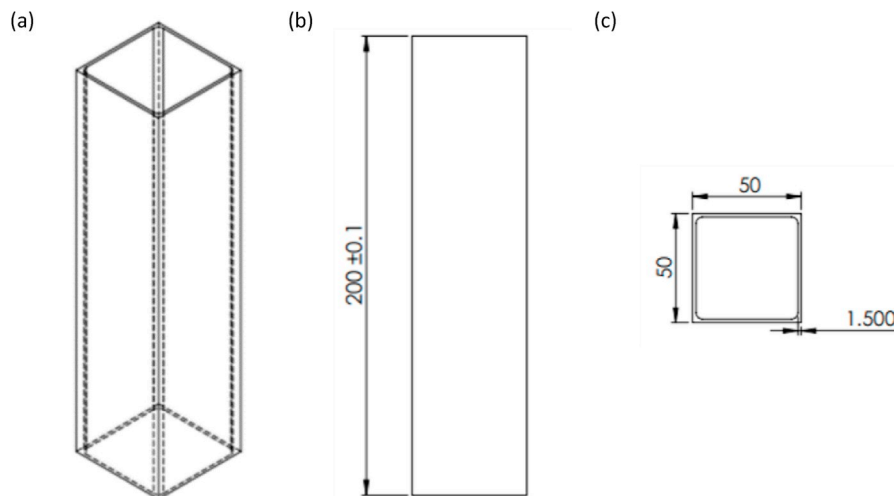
Crush tube geometry: (a) isometric, (b) front and (c) top view (units in mm).
